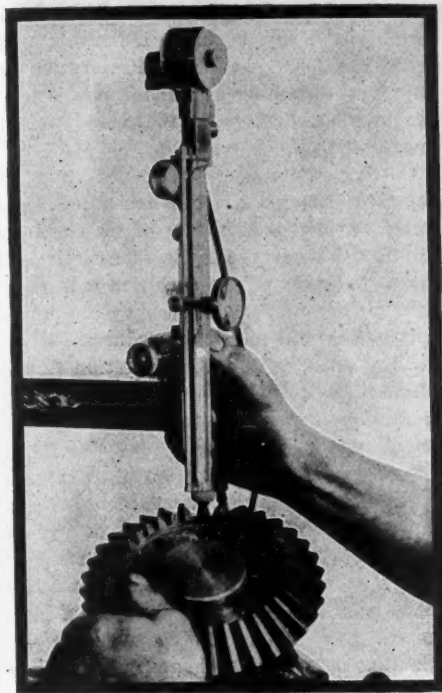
TESTING GEAR WITH SHORE SCLEROSCOPE
